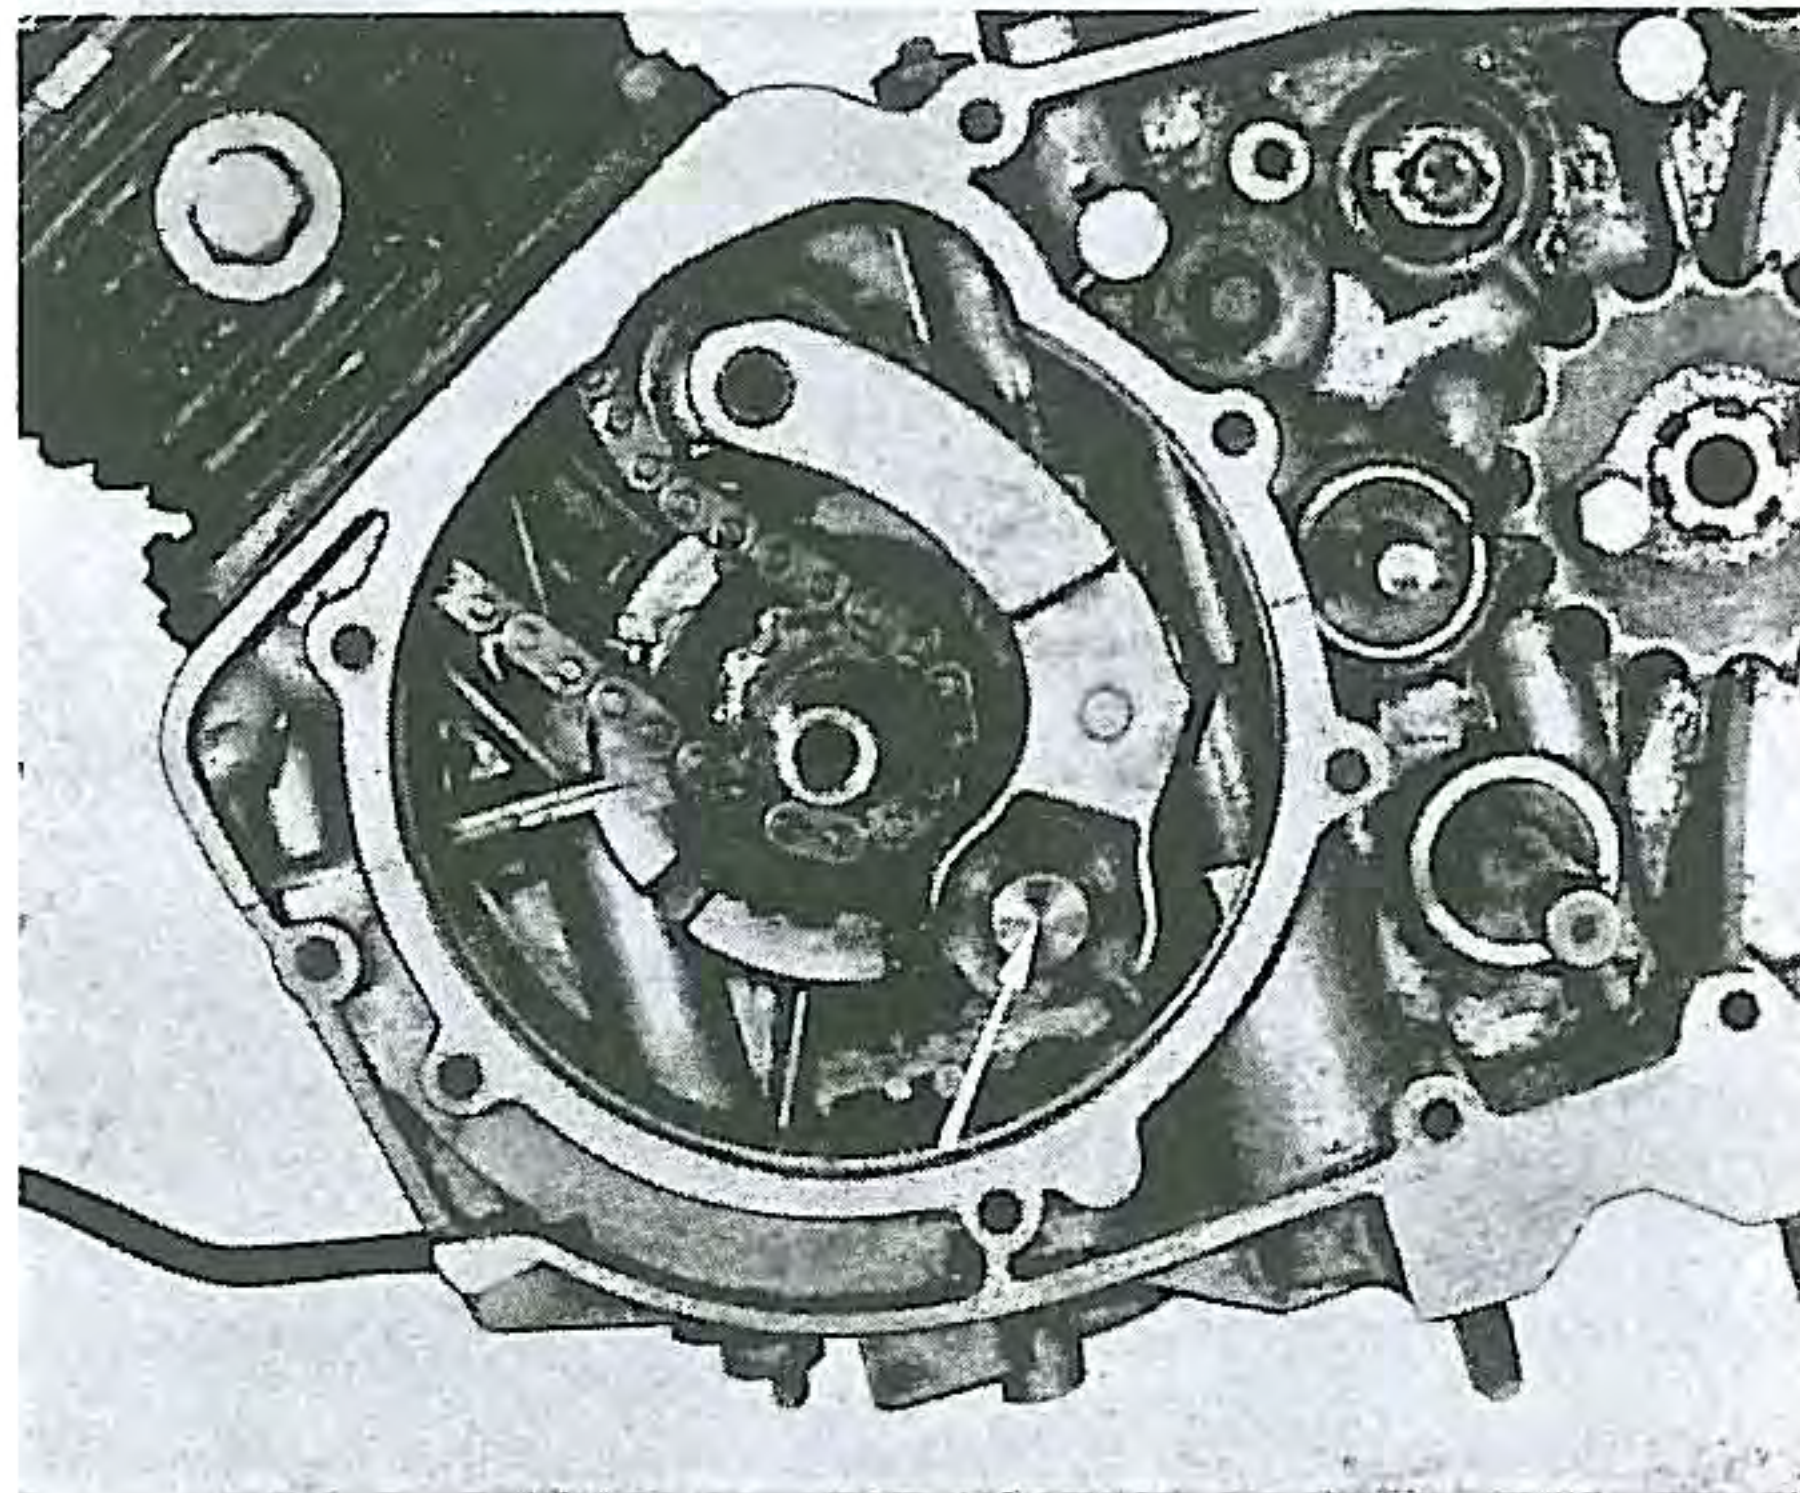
Cam chain tensioner pivot bolt (arrow mark)
